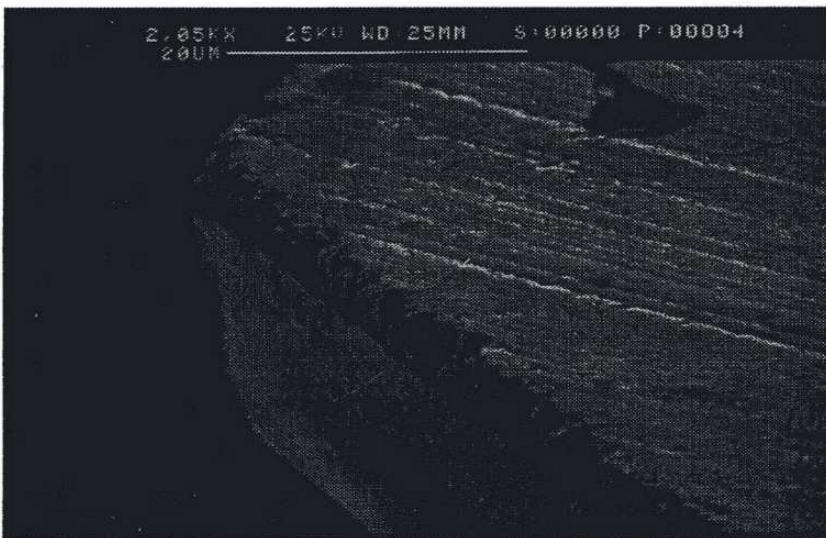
An Uncoated Drill After Drilling One Hole [52]
